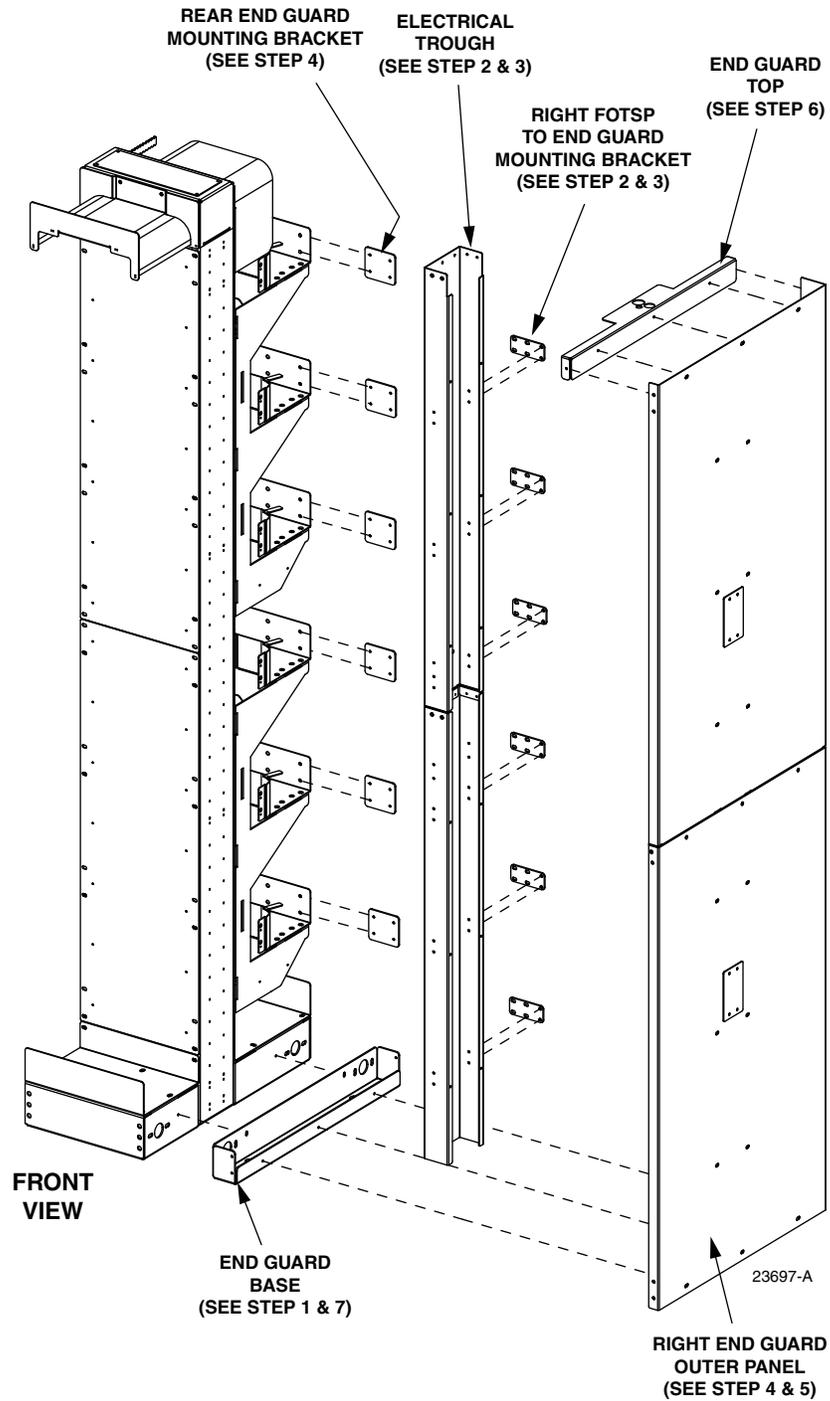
Right Side Installation on FOTSP Exploded View and Steps
